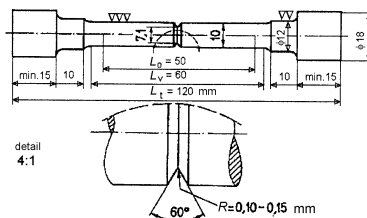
Circumferentially notched and fatigue pre-cracked K_{Ic} test specimen.
